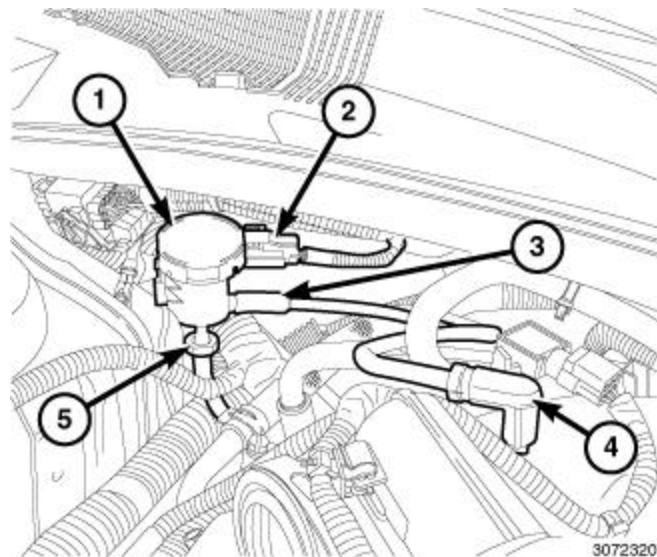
EVAP Purge Solenoid, Electrical Connector & Vacuum Lines
